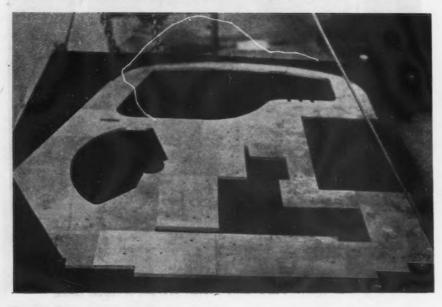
Shown here is one stage in the construction of the sectional punch which is made of 1/2-in. tool steel and is mounted on a 11/2-in. cast iron punch plate. The pattern of sections was decided on through the use of a paper layout.
